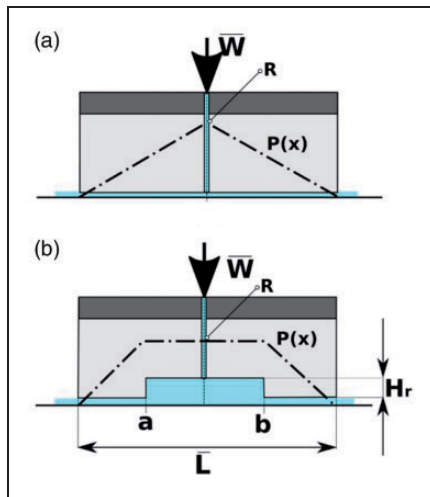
(a) Parallel hydrostatic bearing. (b) Hydrostatic bearing with recess.
